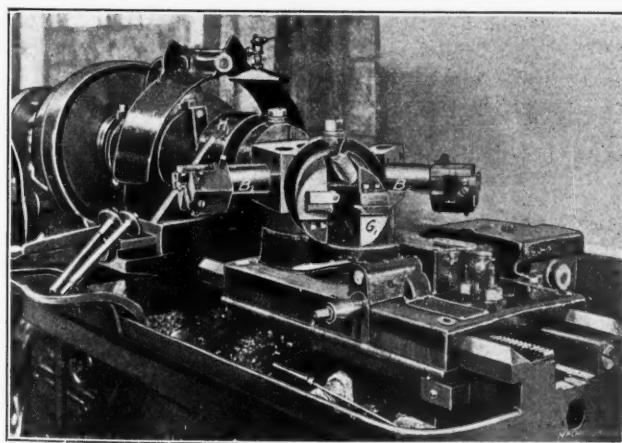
Rough-turning and Centering the Spindles on the Potter & Johnston Automatic Chucking Machine
